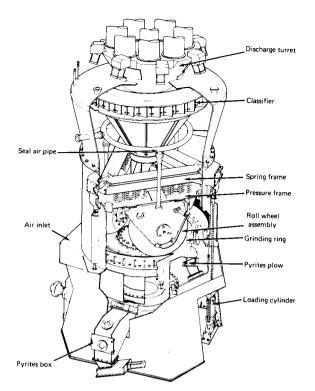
Slow-speed pulverizer, roll-and-race type.
